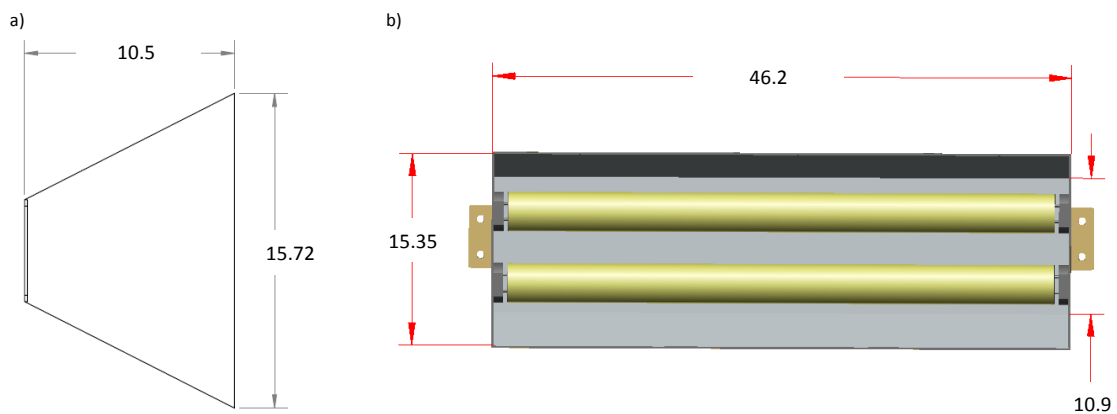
Representation of the Photoreactor Inner (a)Front and (b) Side View with Dimensions in cm, Highlighting: 1) Annular Section, 2) Reflector Section and 3) Pulley Probe Mechanism.
